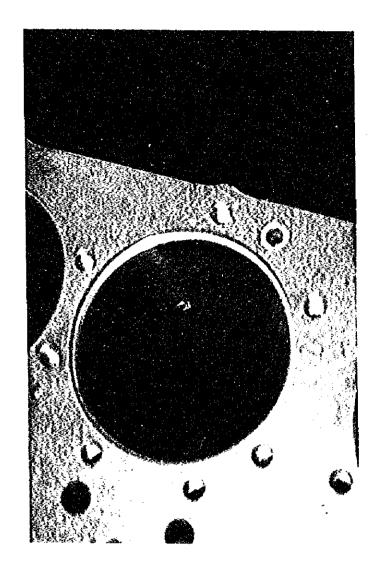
A Blow Hole Defect on the Cylinder Bore
